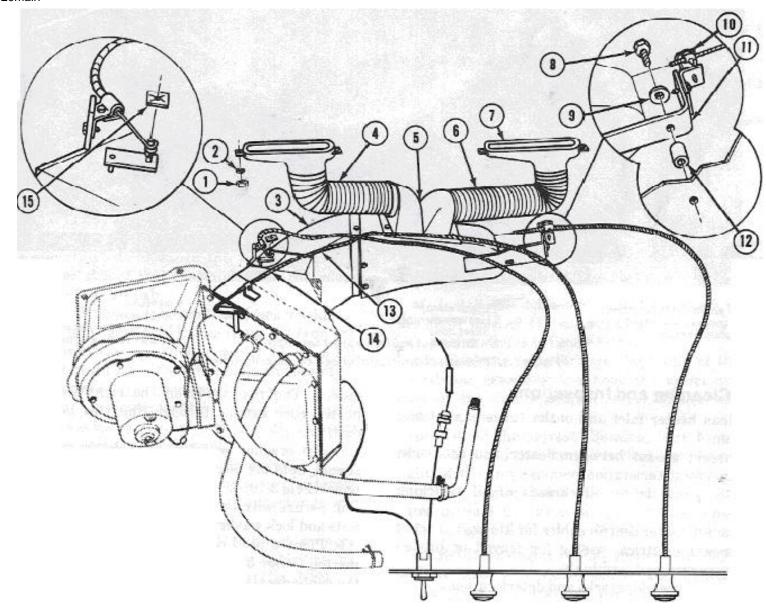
F5-Fresh Air Heater and Defroster, Front View
